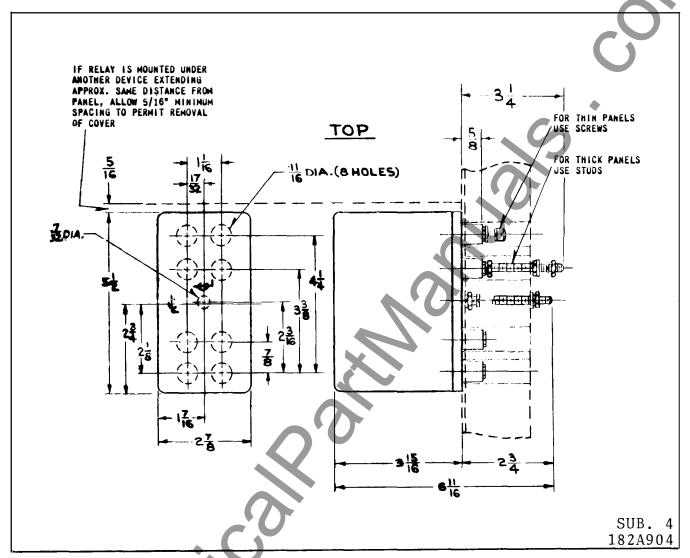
Type AR Relay - Molded Base Rear Connected Outline & Drilling Plan.
